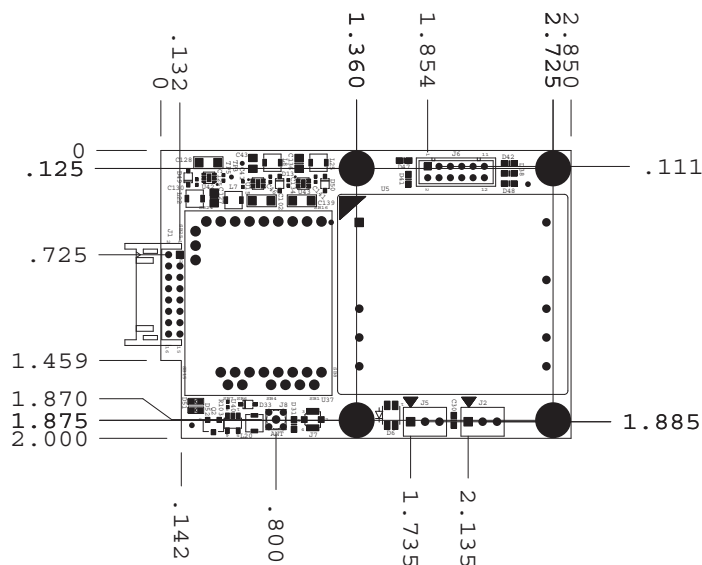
BDR SAASM HD CSAC GPSDO Board Mechanical Drawing
